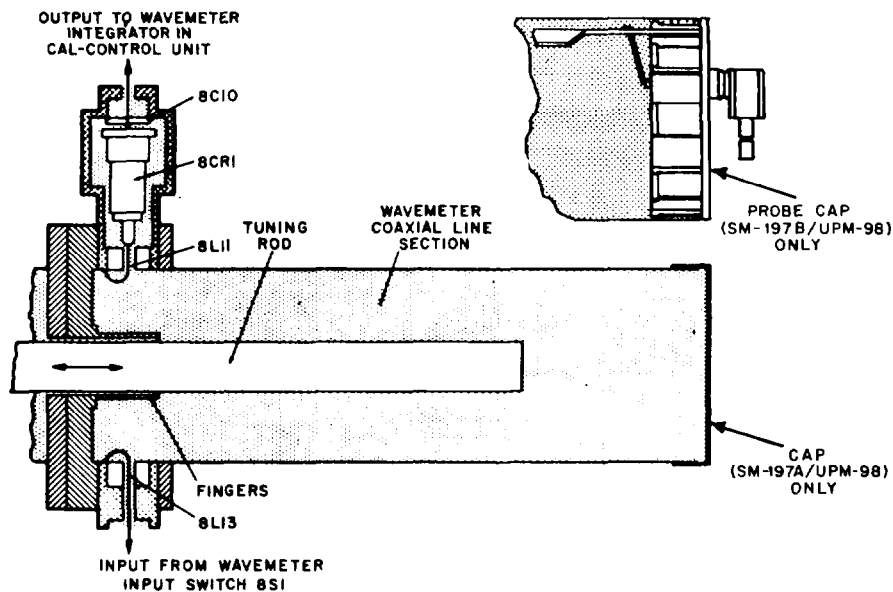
Wavemeter Assembly 8A3, Cutaway Drawing
